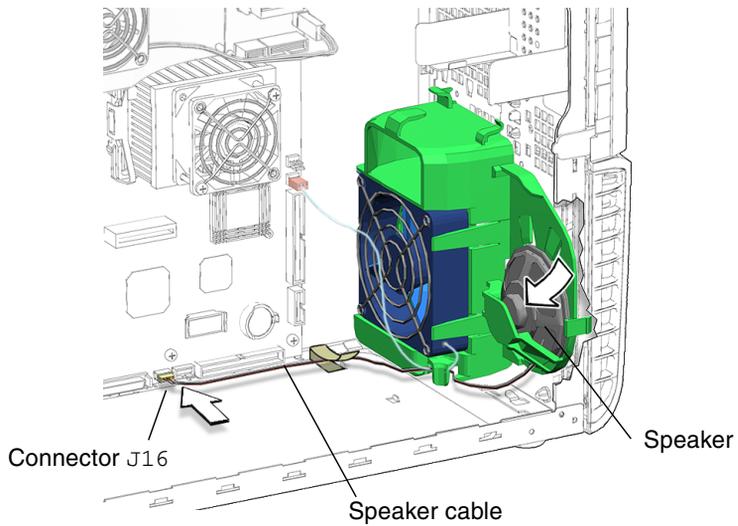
Aligning and Installing the Speaker and Cable
